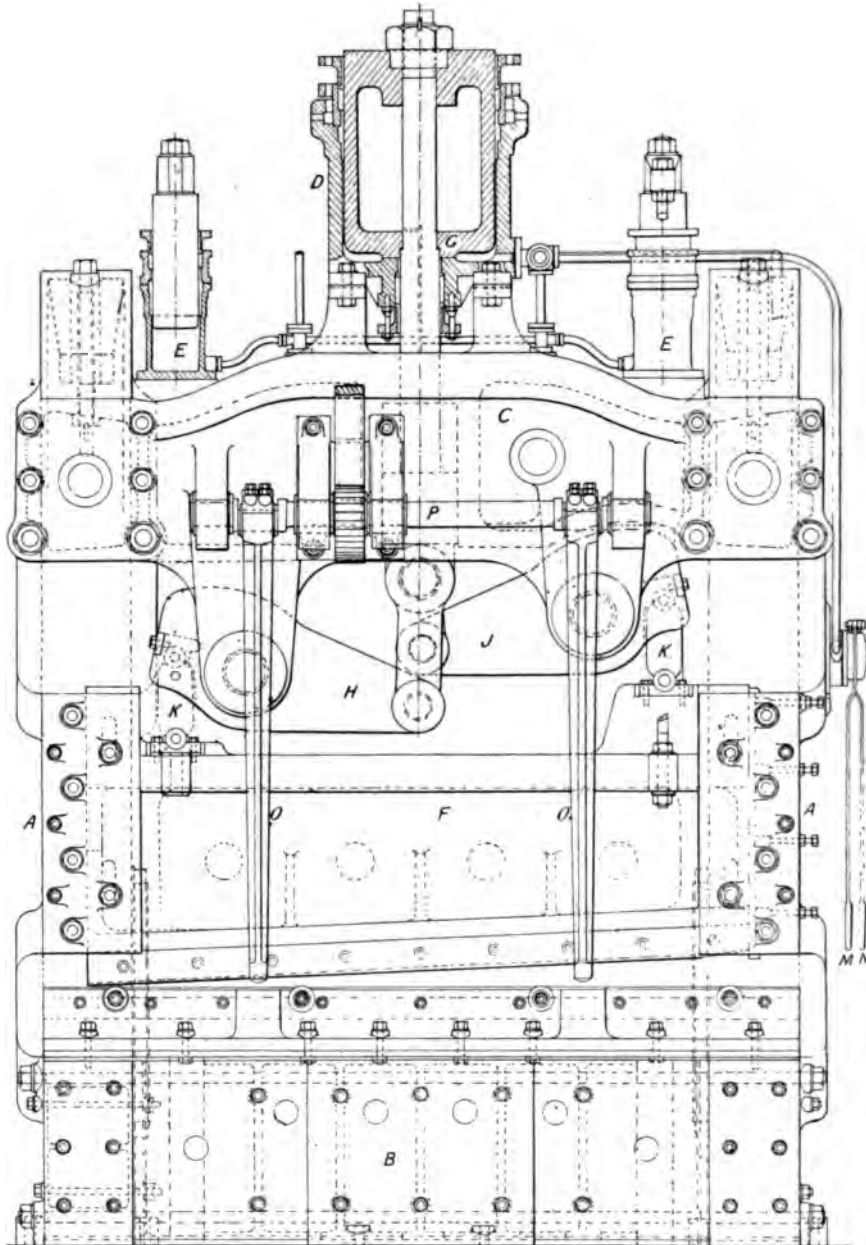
Double Standard Hydraulic Lever Shears, with Hydraulic Plate Holders. (Front Elevation.)
